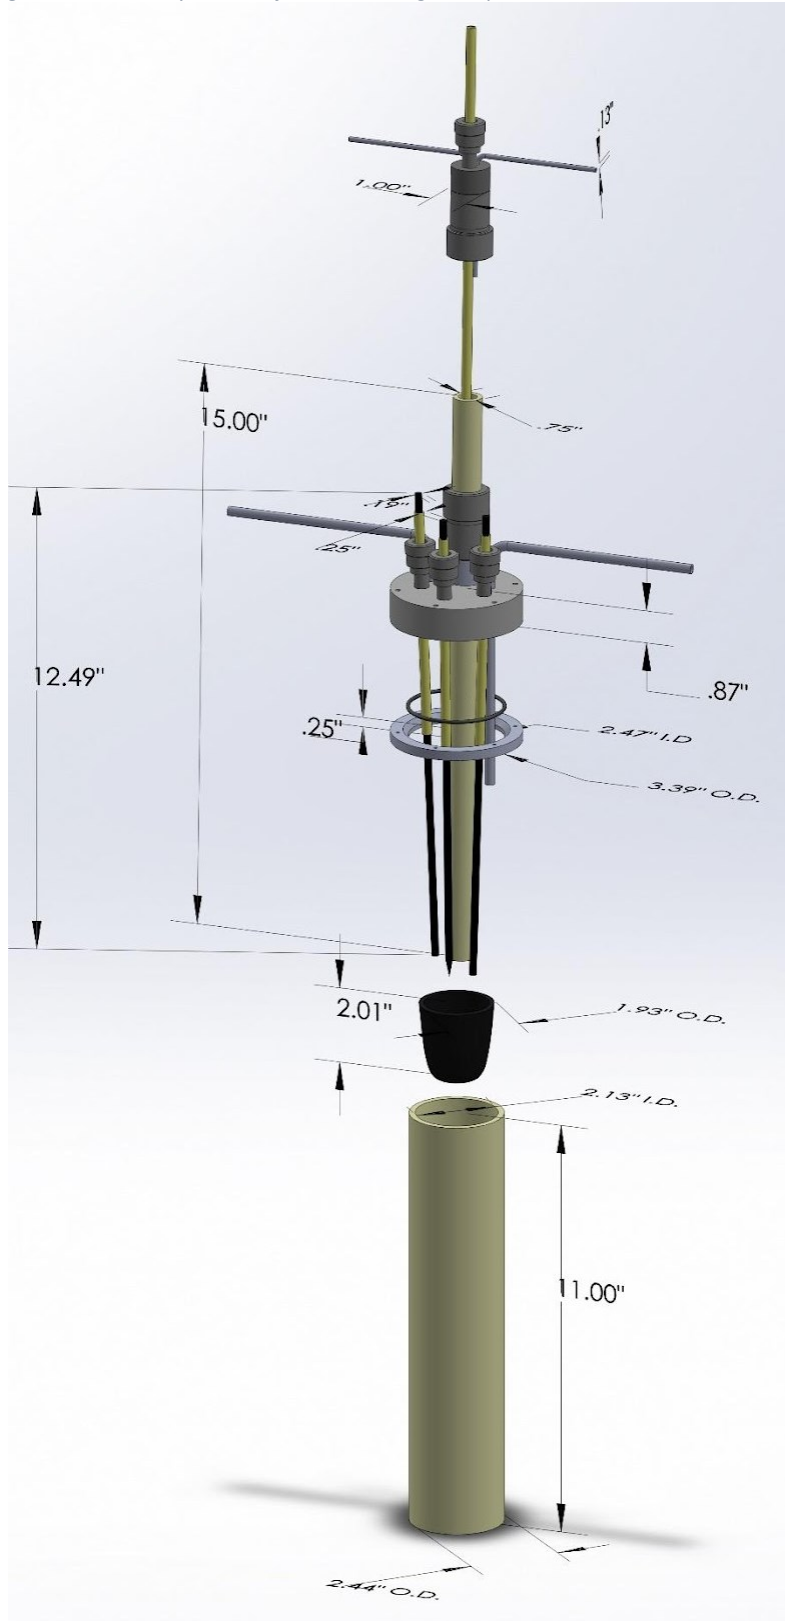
Exploded render of high-temperature reactor, including component dimensions.
